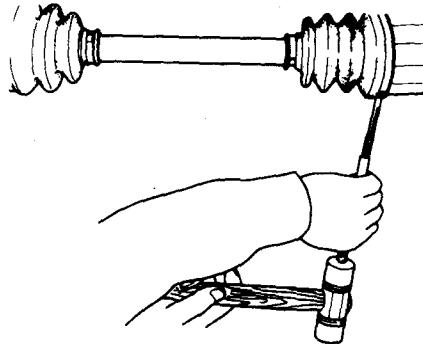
Separating D.O.J. from axle drive shaft
